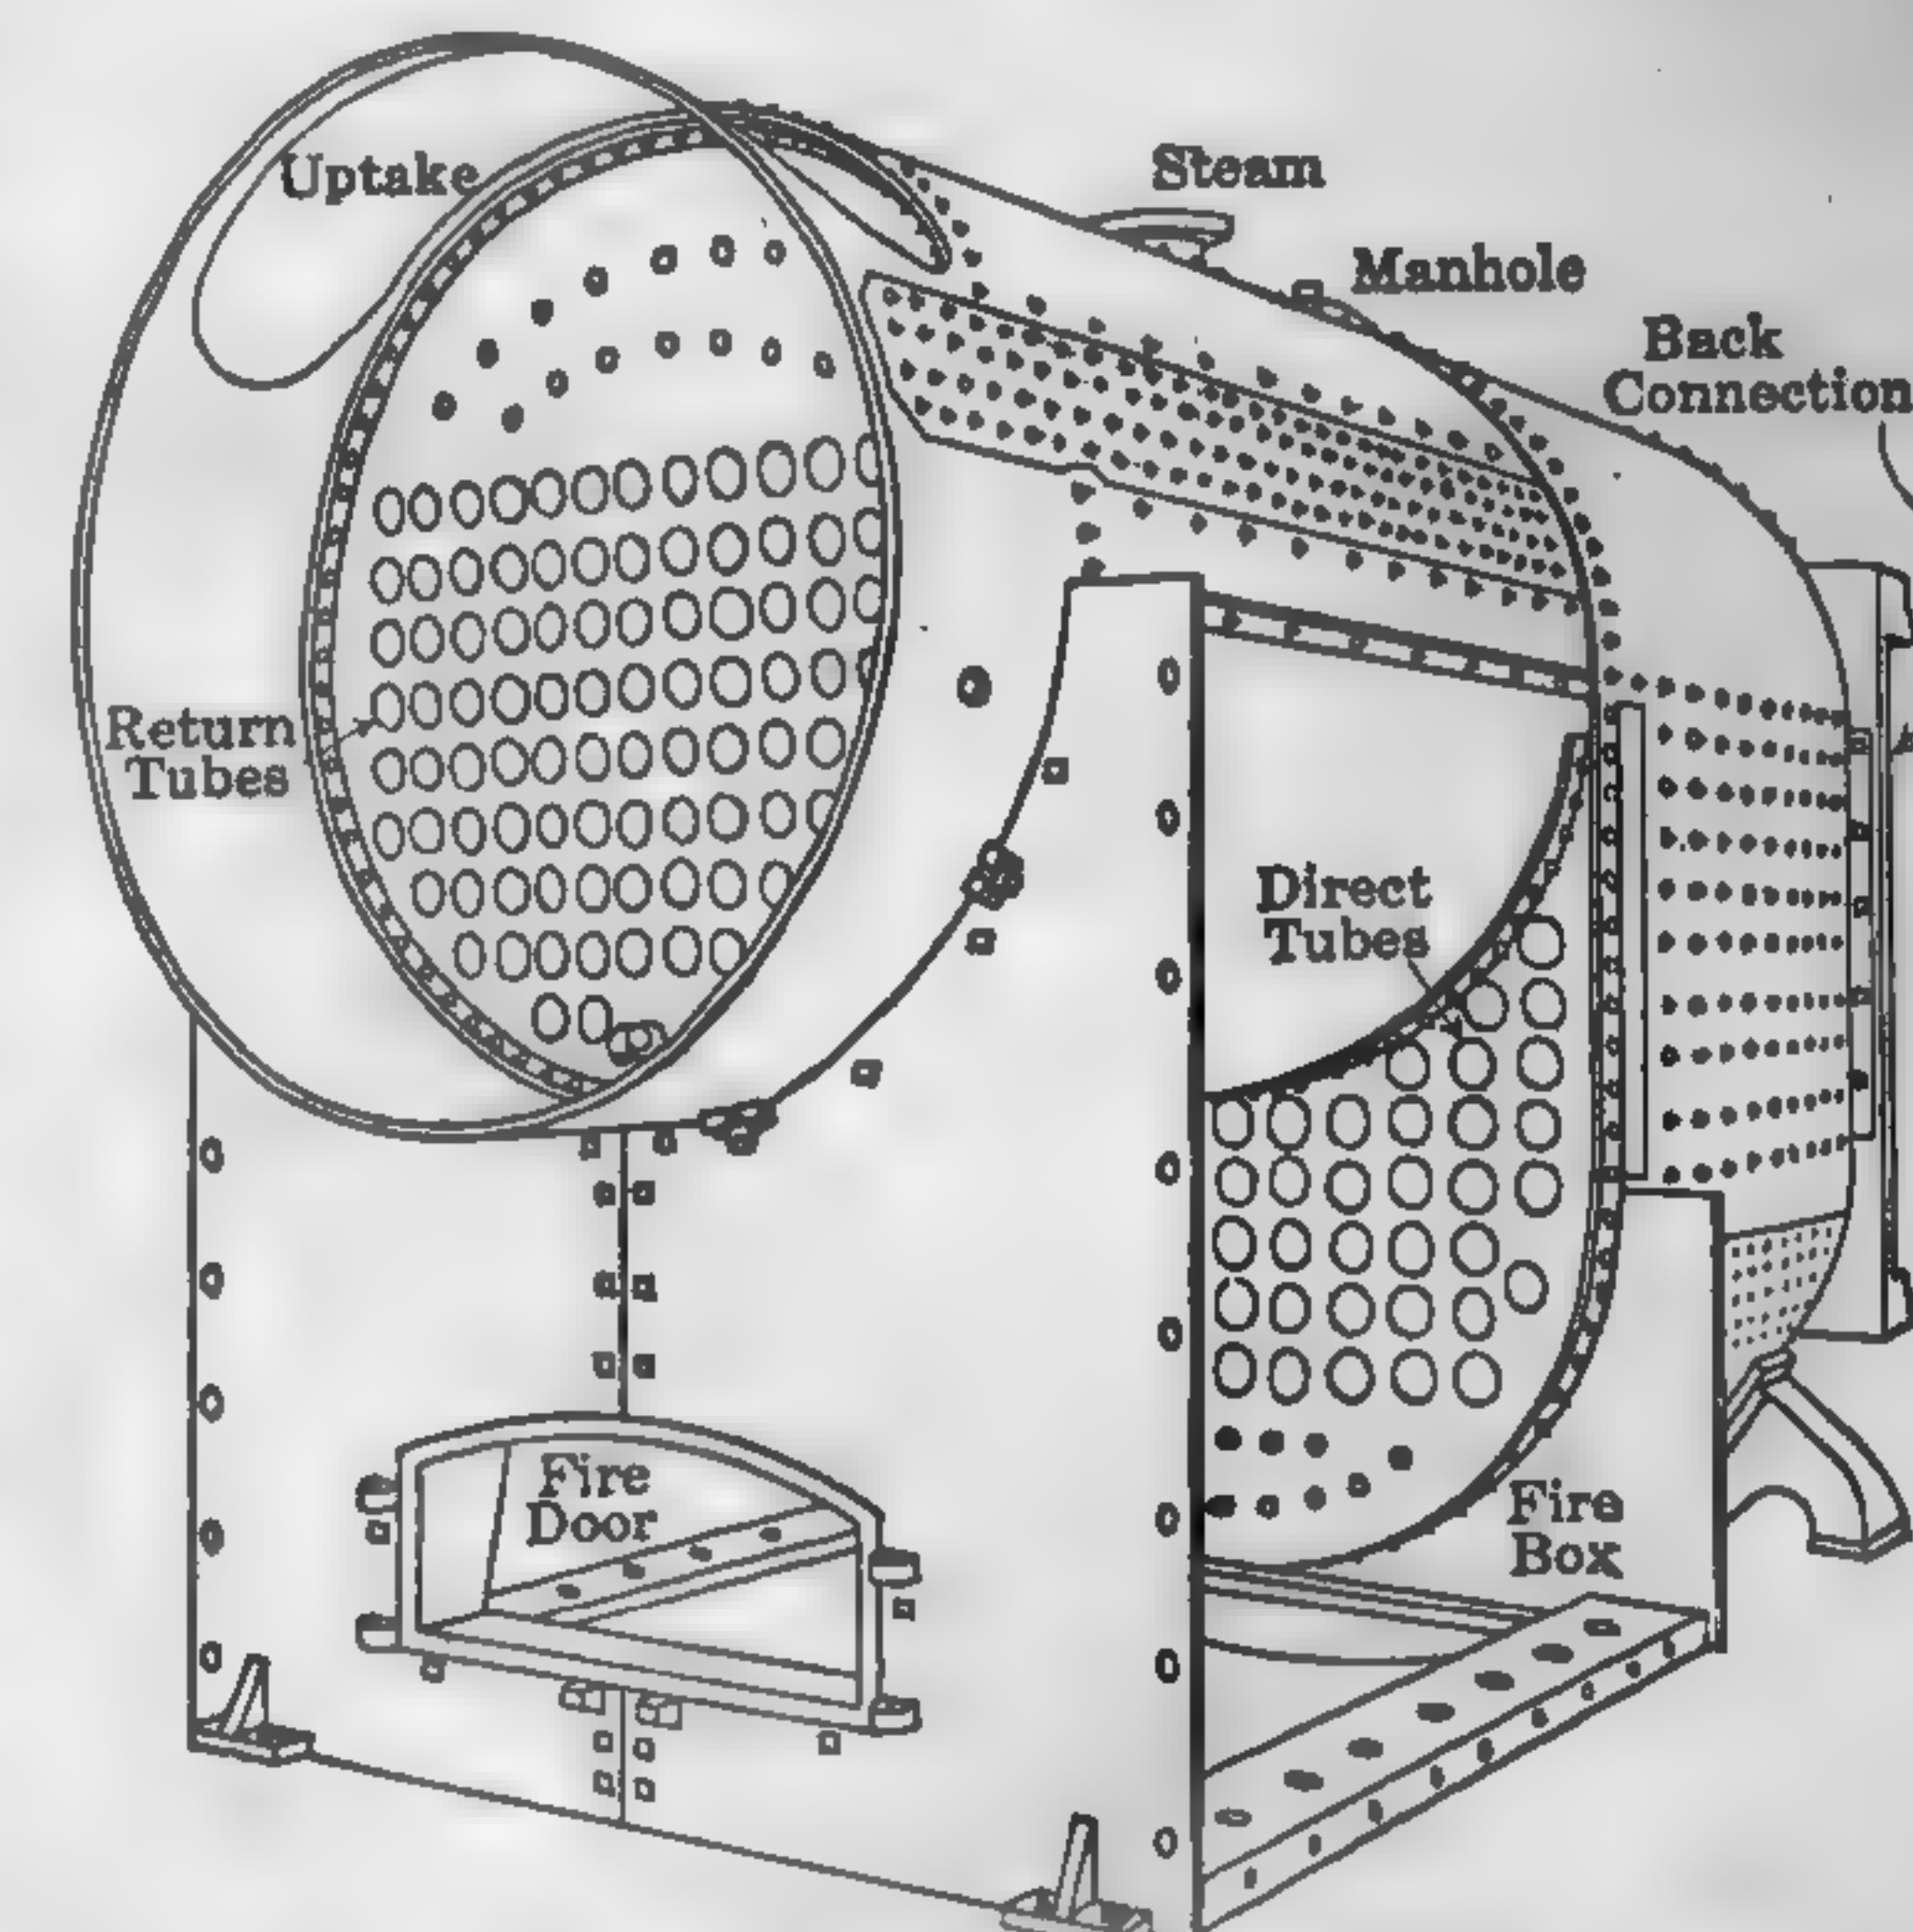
Return Tubular Portable Fire-box Boiler. (Side Plates Removed to Show Furnace Construction.)
